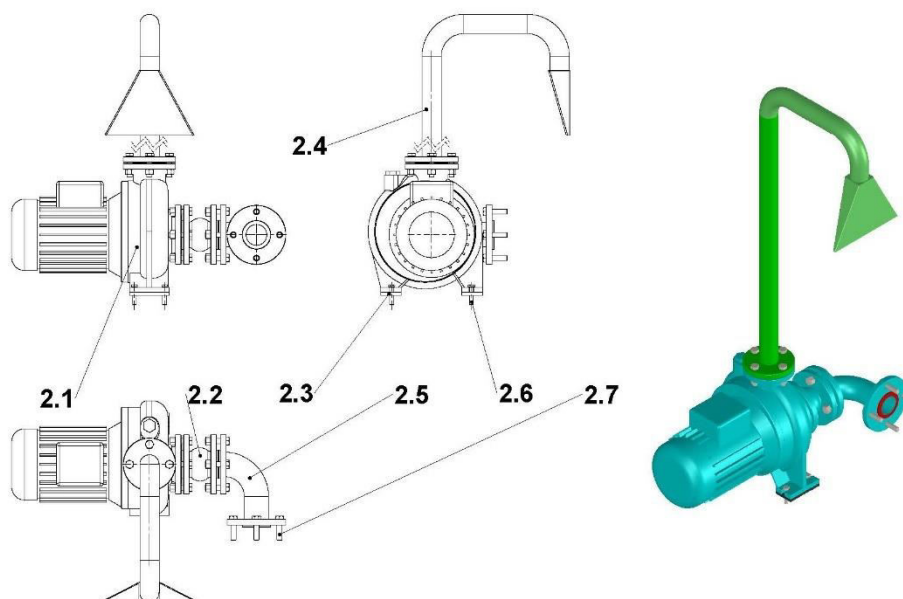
Assembly-mounting drawing and isometric view of the pumping module
